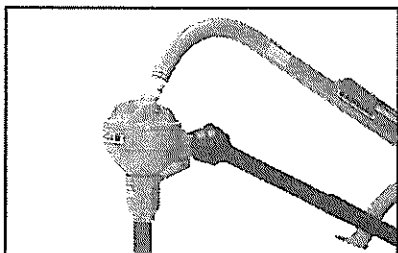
AUGER ADAPTER GUARD INSTALLED
